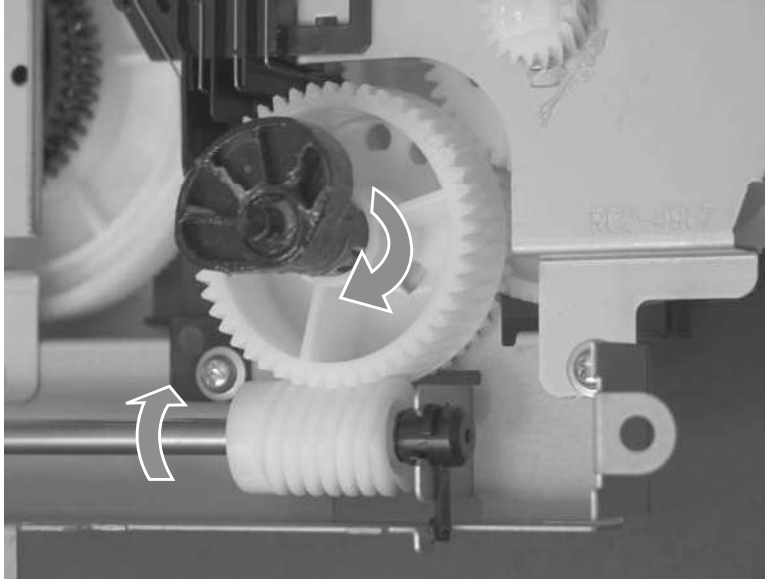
Reinstall the main drive assembly (2 of 11)
